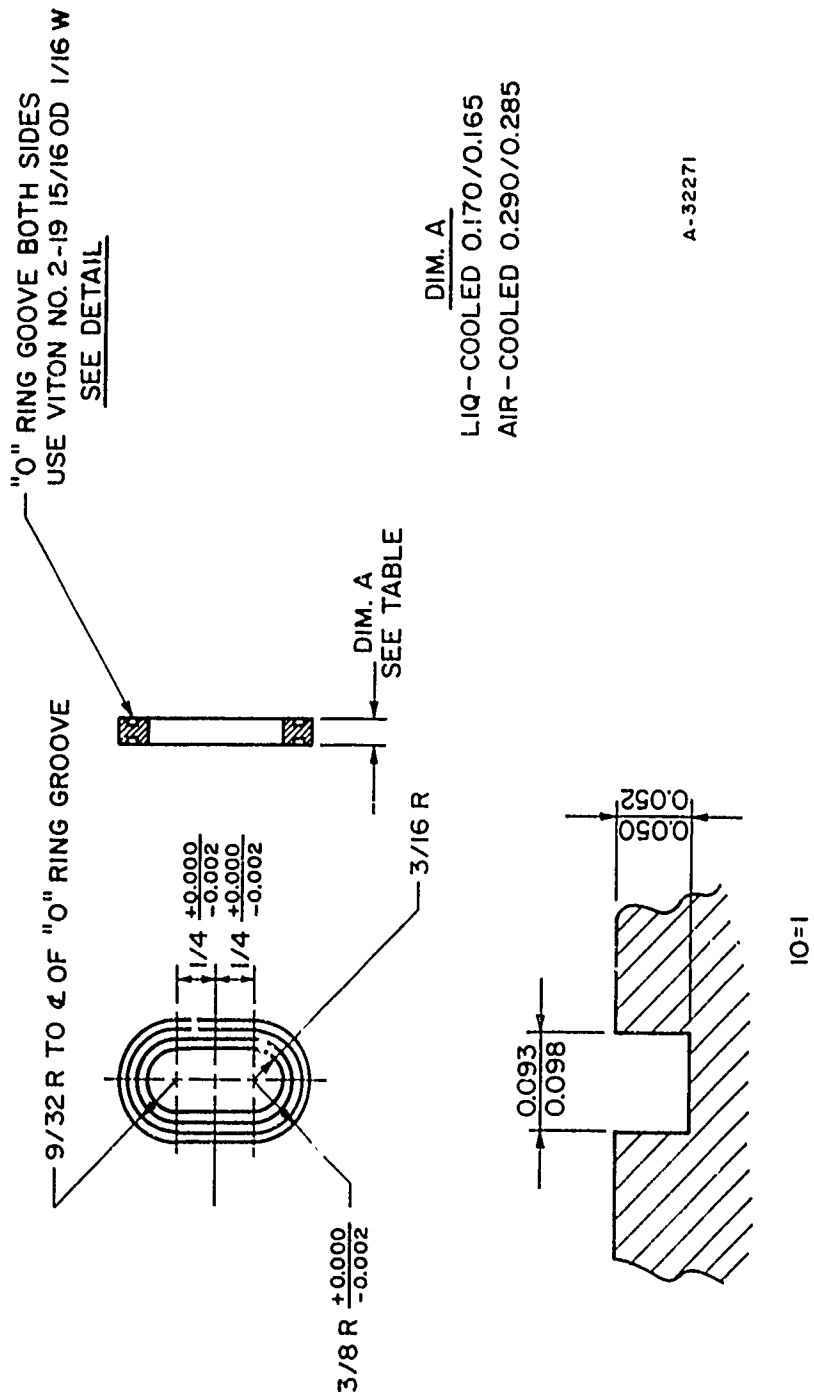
ENGINEERING DRAWING OF PLASTIC INSERT FOR COOLANT PLATE
